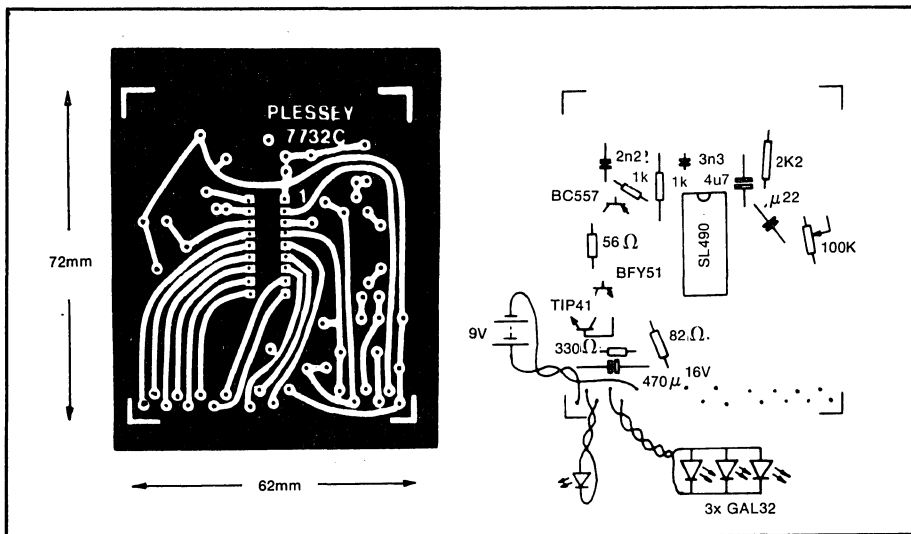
Infra-red Transmitter P.C.B and Component Layout
